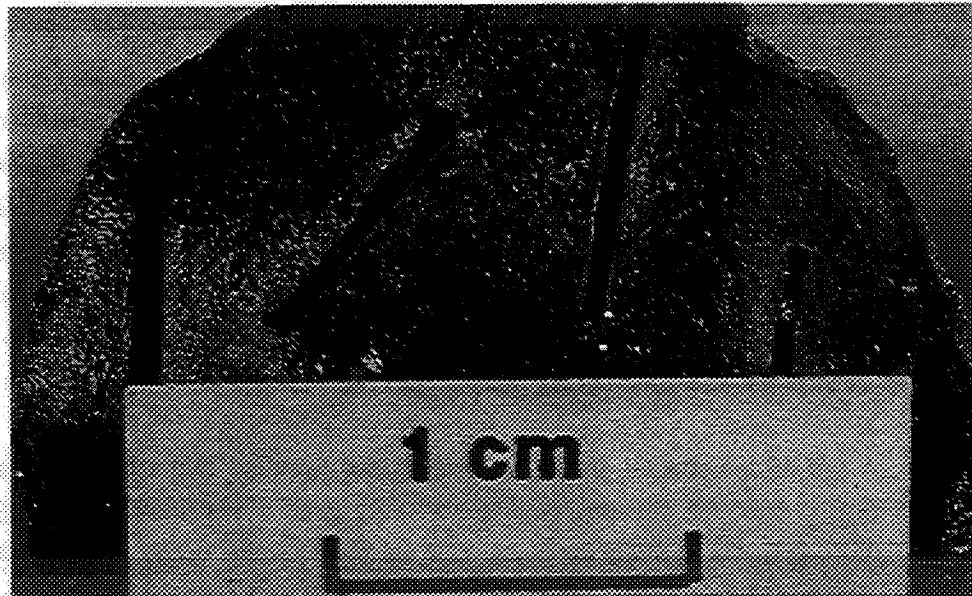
Carbon-carbon disk machined with 0.25 mm thick slitting saw.
